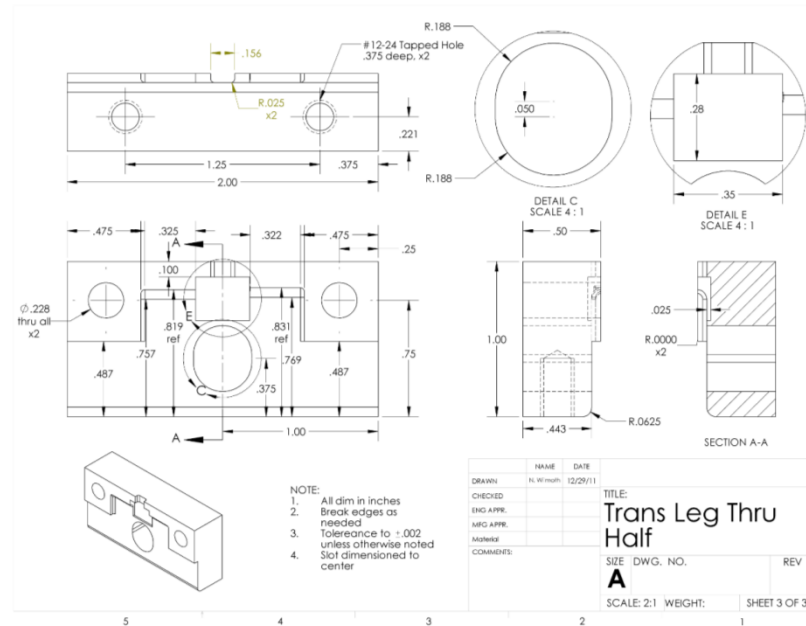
Transverse Specimen Fixture Half without Upper Threaded Holes
